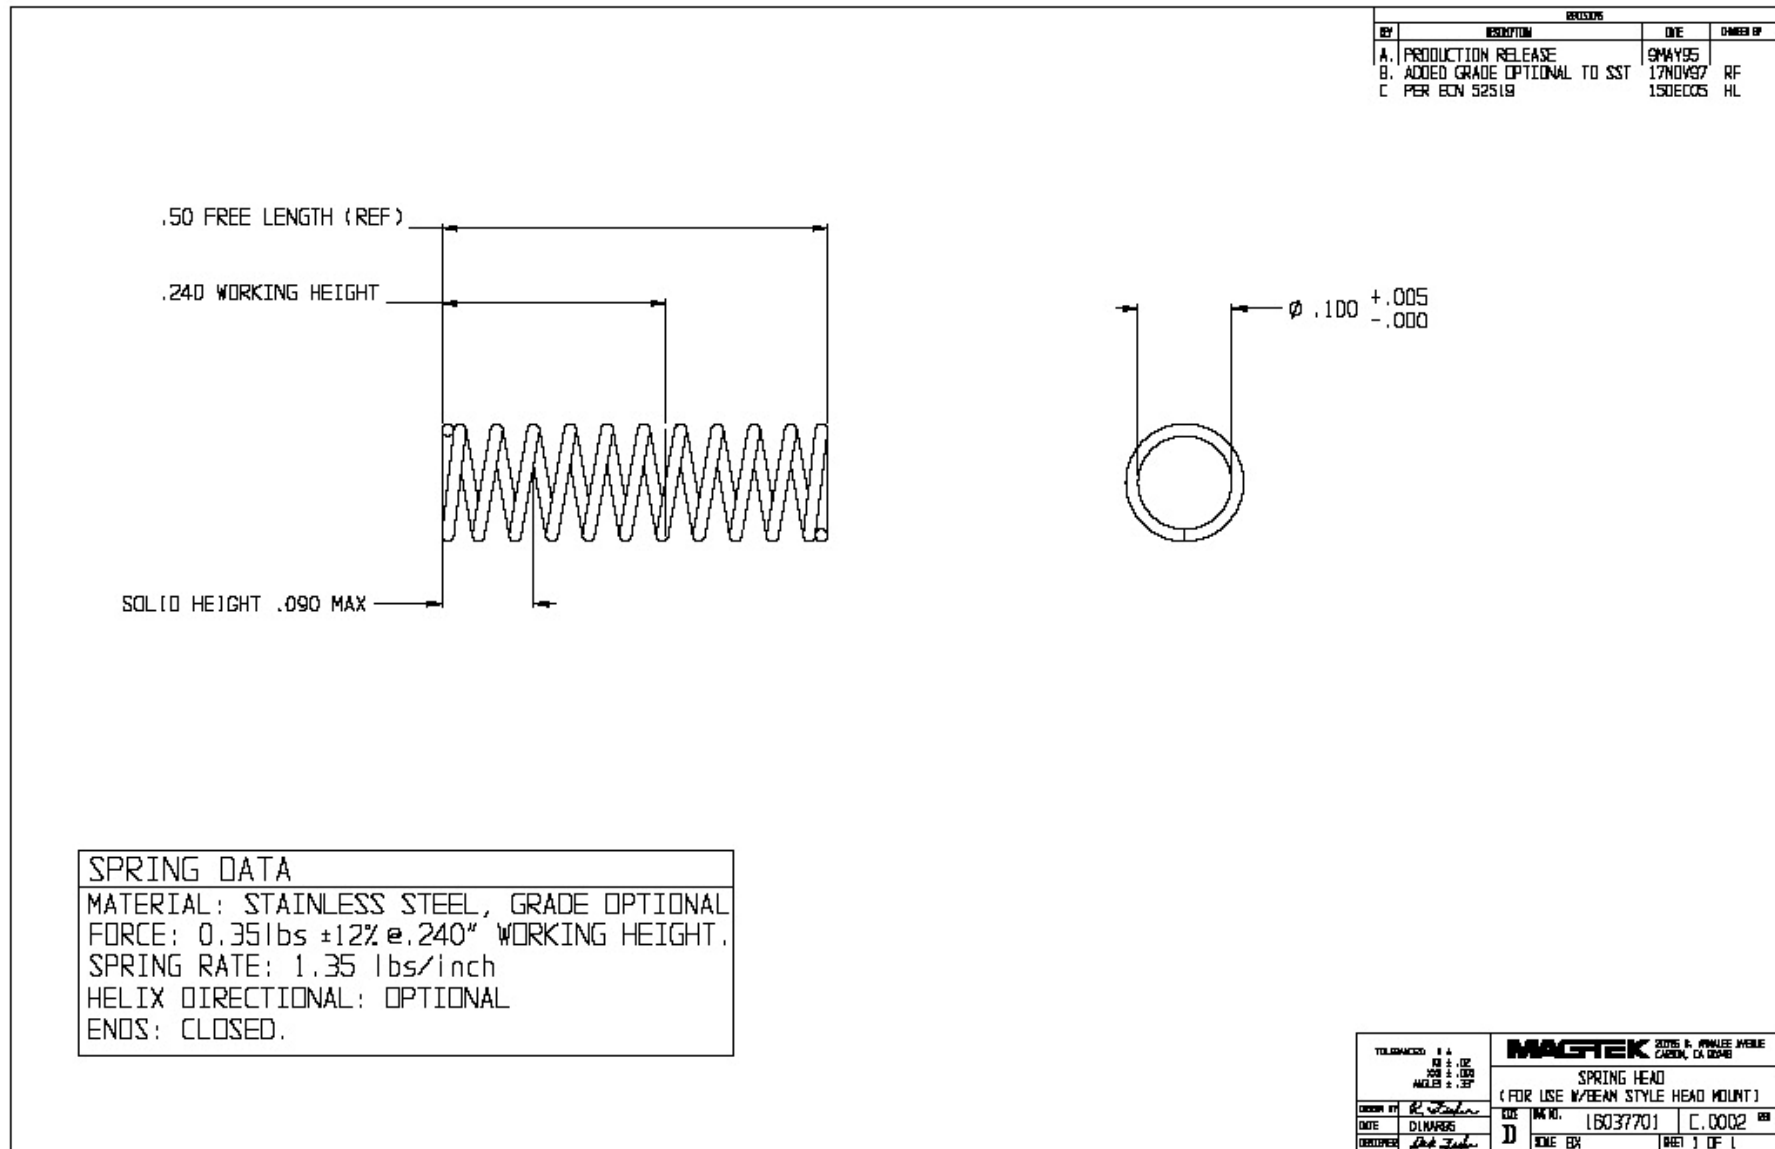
Head Spring (Used for Beam Style Head Mounting)
